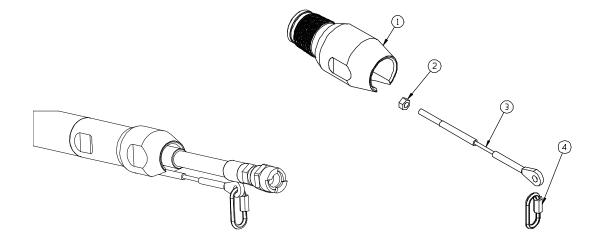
Typical Tail Adapter Cable Puller Assembly
